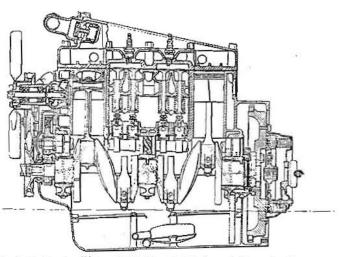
Sectional arrangement of 1,476 c.c. side-valve petrol engine (type VSISM)
